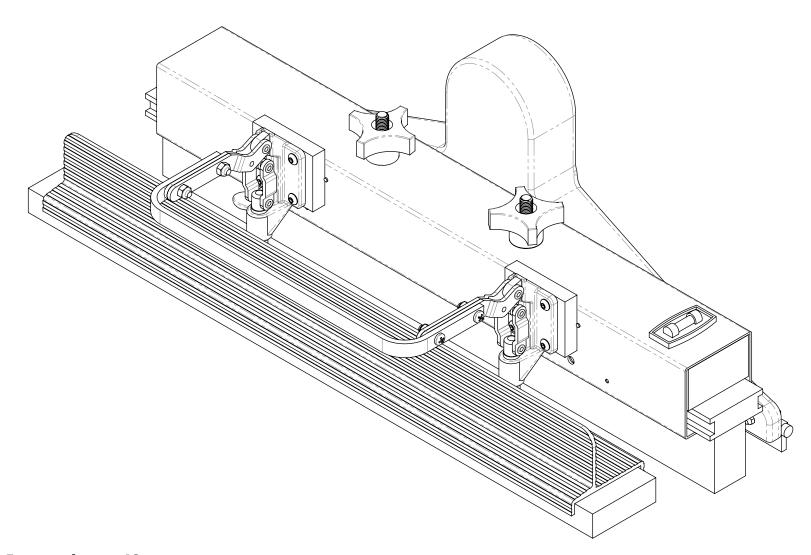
32" Nylon Grit Head Assembly 190-100-012 Rev. B
